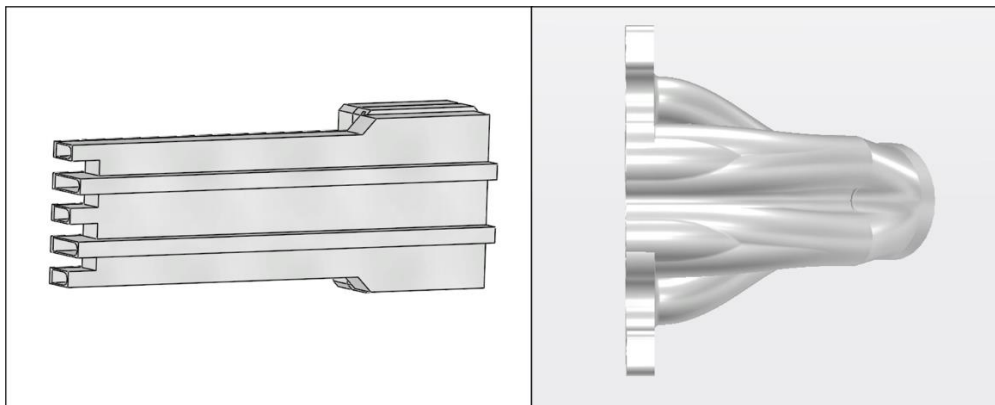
Design of the paper machine part module. Conventional design is on the left, and additively manufactured design on the right. (Santala 2024.)
